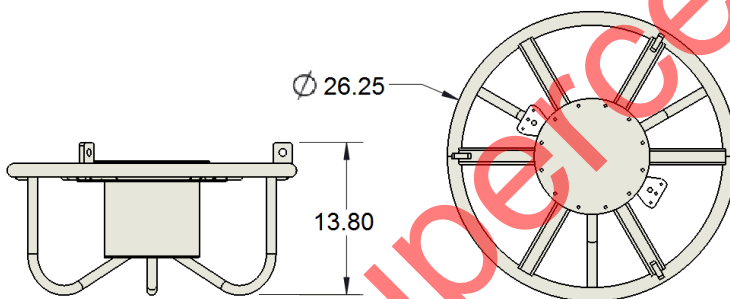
Side and Top View of the 6 Hook Carousel Cage (C2-6HC) shown without hooks.
